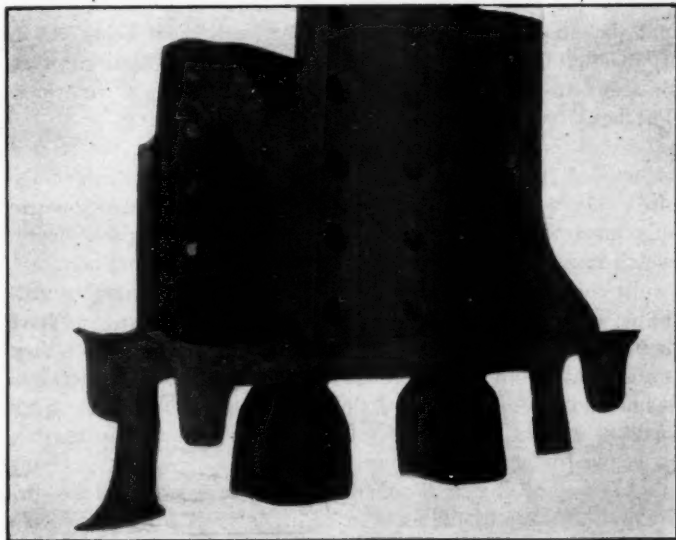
HEAVY BOLSTER-CENTER FILLER CASTING WITH TWO HEADS
